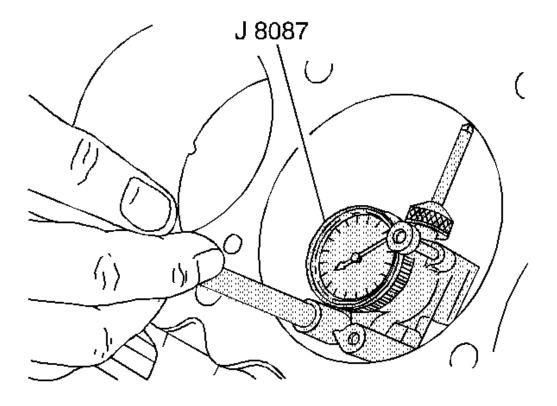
Inspecting Cylinder Bores Using J 8087 Courtesy of GENERAL MOTORS CORP.
